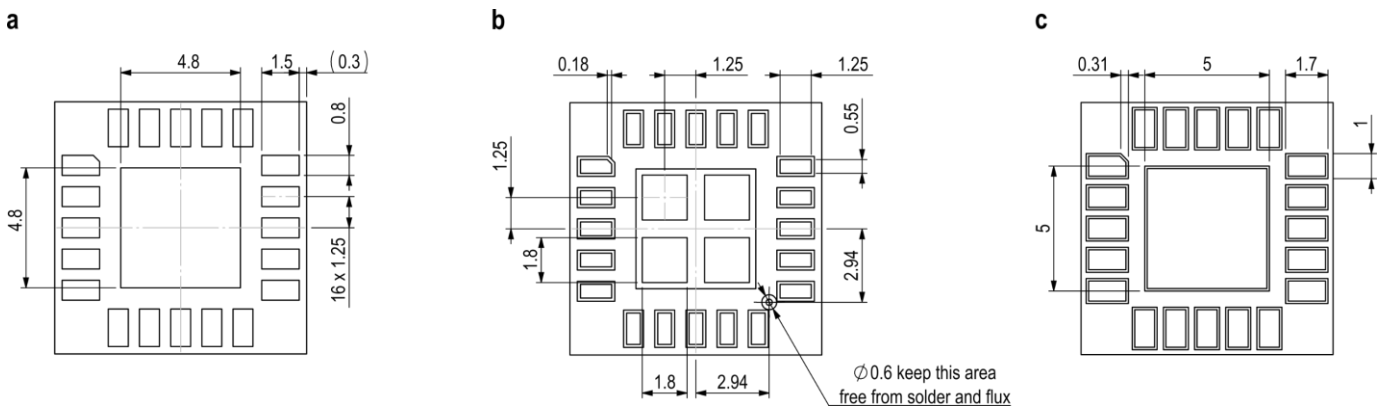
Recommended SCD4x footprint (top view): landing pads (a), solder paste (b) and solder mask (c). All dimensions in millimeters.
